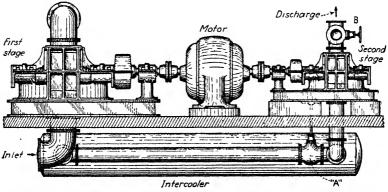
Two-stage arrangement of two-impeller compressors with intercooler.
